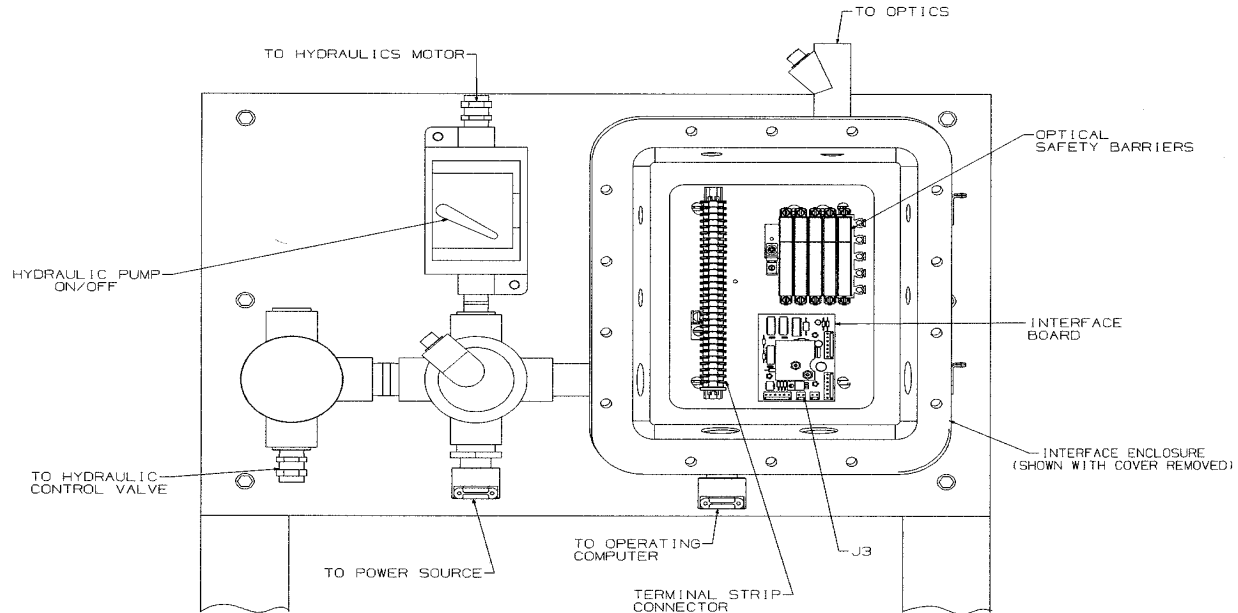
Typical Prover Control Panel Assembly (12" shown)
